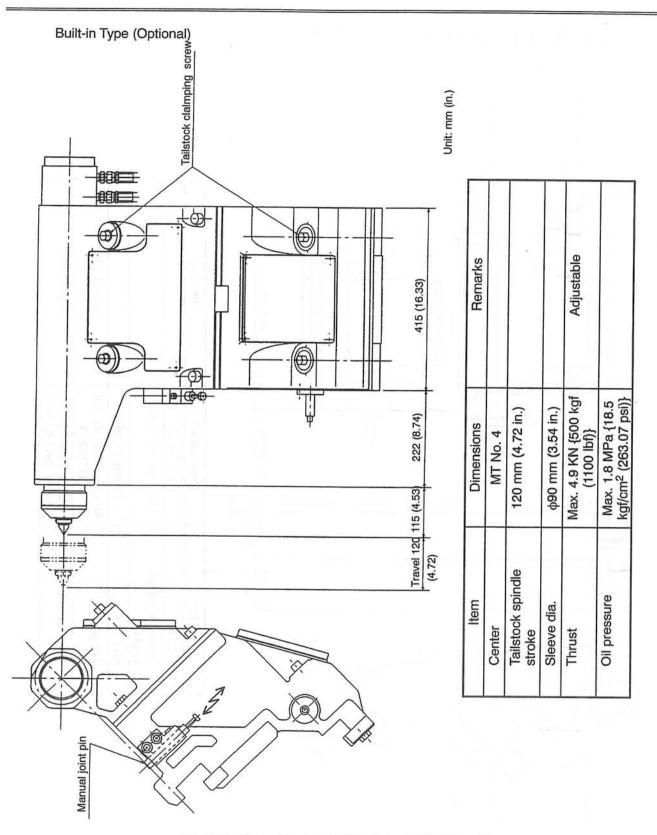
Manual Hydraulic Tailstock (Built-IN Type)
